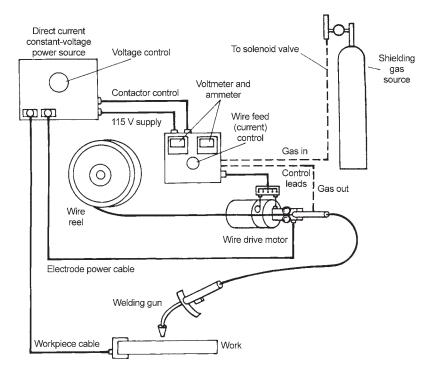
Semiautomatic flux cored arc welding equipment. Source: Ref 2.3
